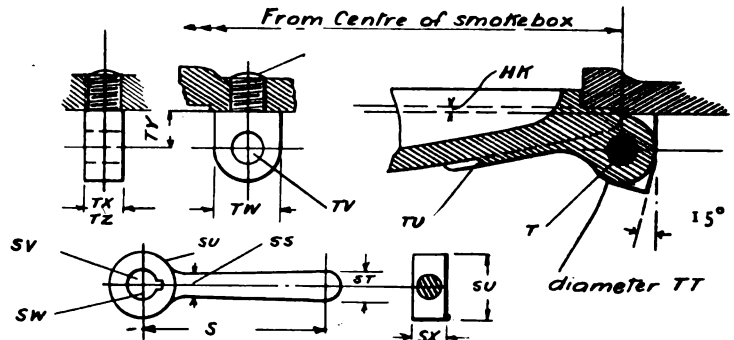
DETAILS OF HINGE AND FASTENINGS.
